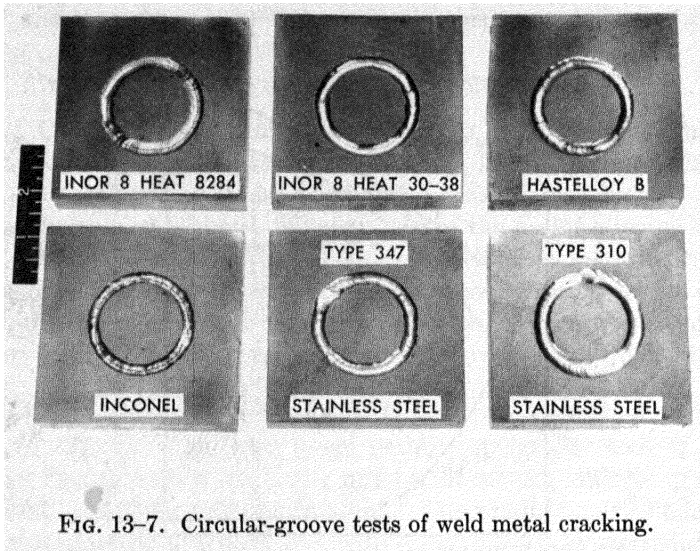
Circular-groove tests of weld metal cracking.
